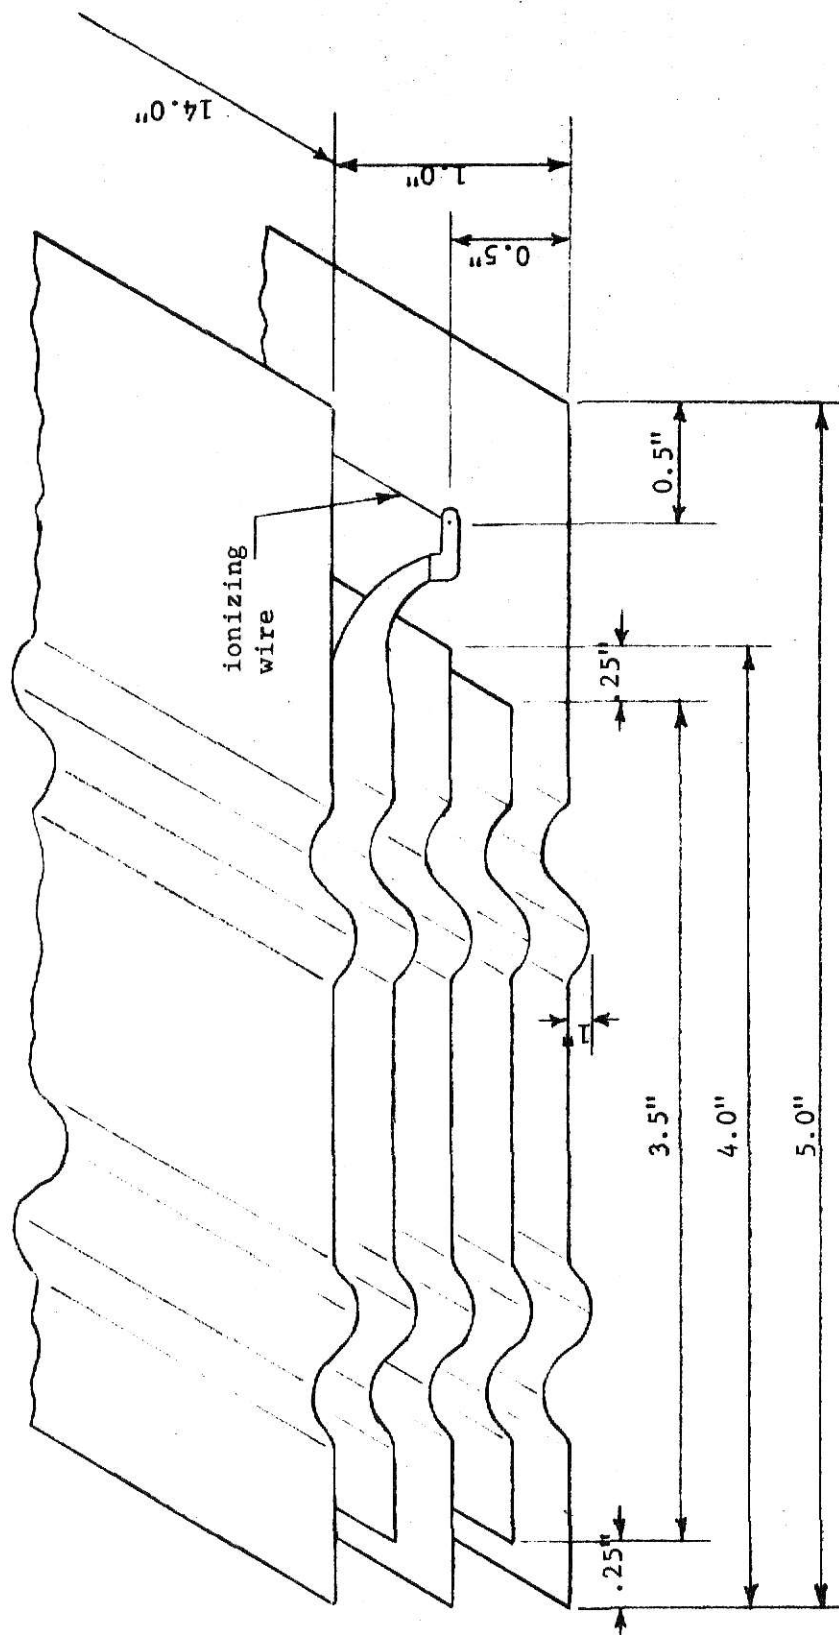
Schematic drawing of Metal-Fab plate arrangement.
